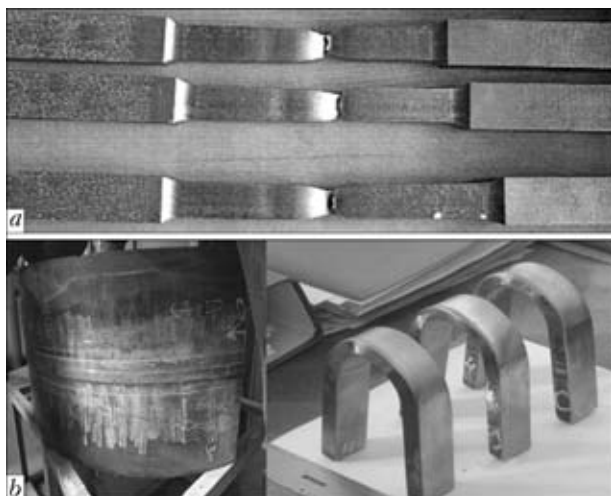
Appearance of specimens of pipe welded joints DN 1220x27 mm after tensile (a) and bending (b) tests
